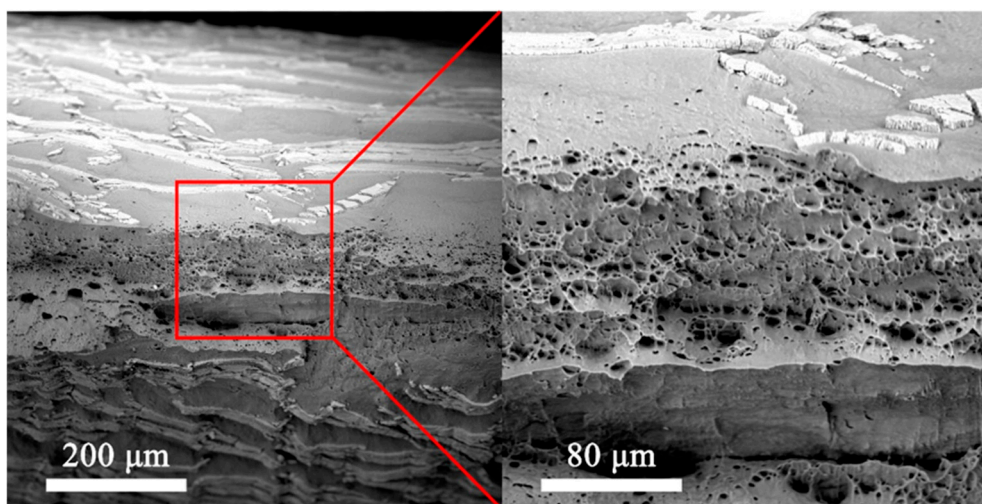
Fracture surface morphology and the magnified morphology of the aluminum layer dimples after annealing at 400 °C for 1 hour in 1-pass rolling.
